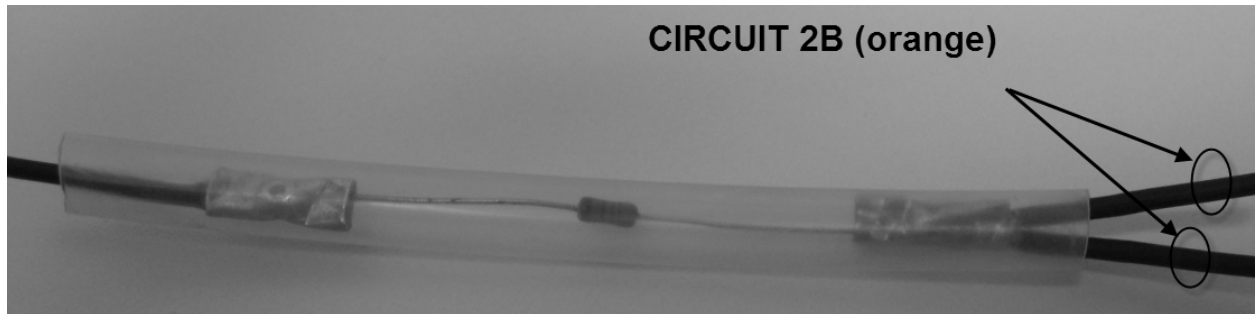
RESISTOR ASSEMBLY TYPICAL
